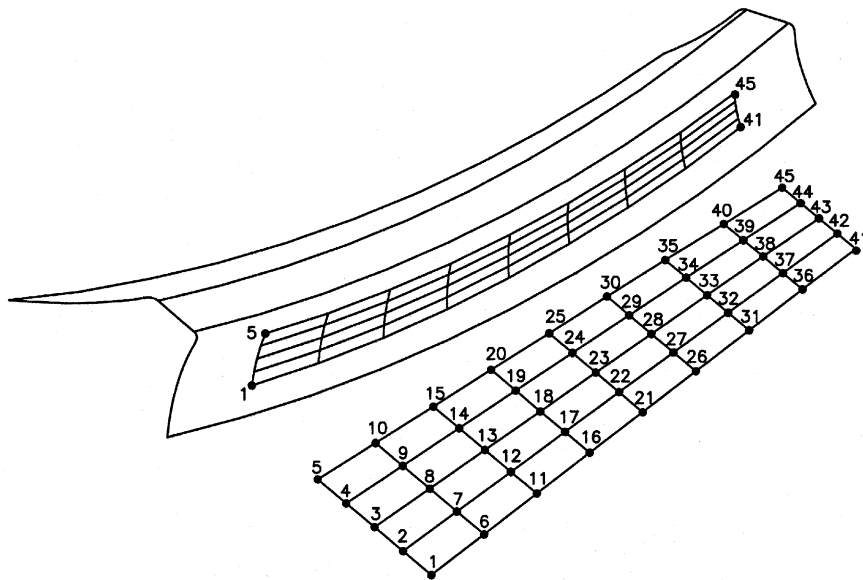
Surface sampling points on the spiral bevel gear convex side.
